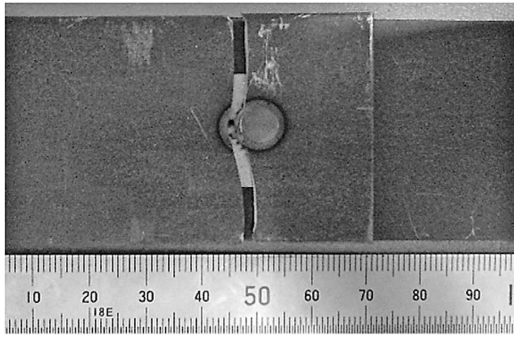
Surface view of fractured TS fatigue specimen with type C crack
